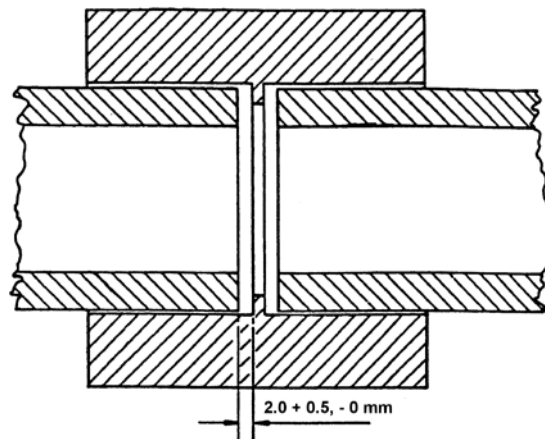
Socket Weld Configuration Prior to Welding.
